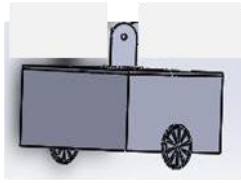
Rigid Base of the Two Wheeled Mobile Welding Manipulator
